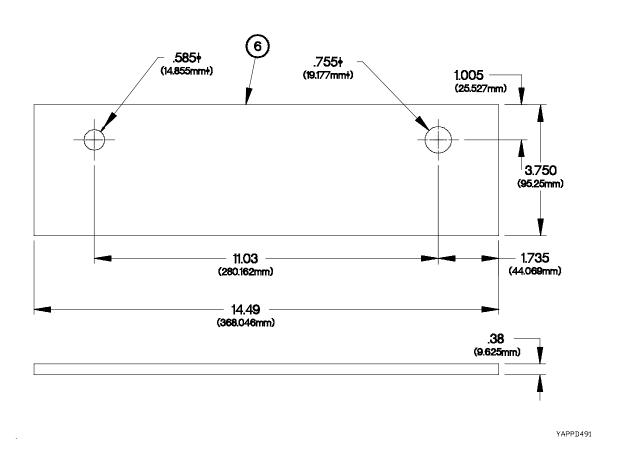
Transmission Lift and Mounting Bracket Bolt Mounting Plates
